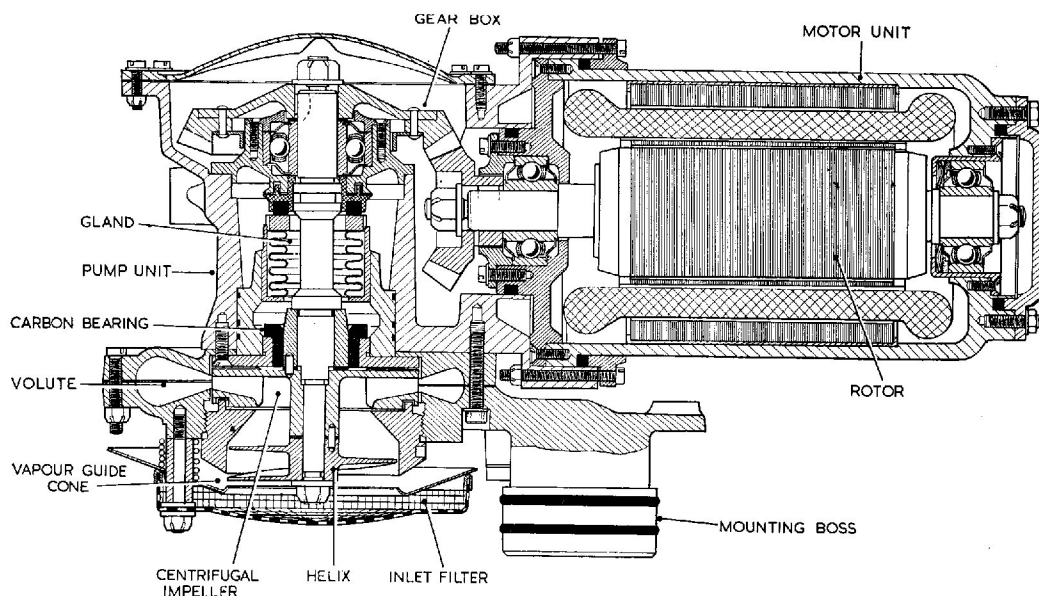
Sectional view of SPE. 1235 Mk. 2 fuel pump
